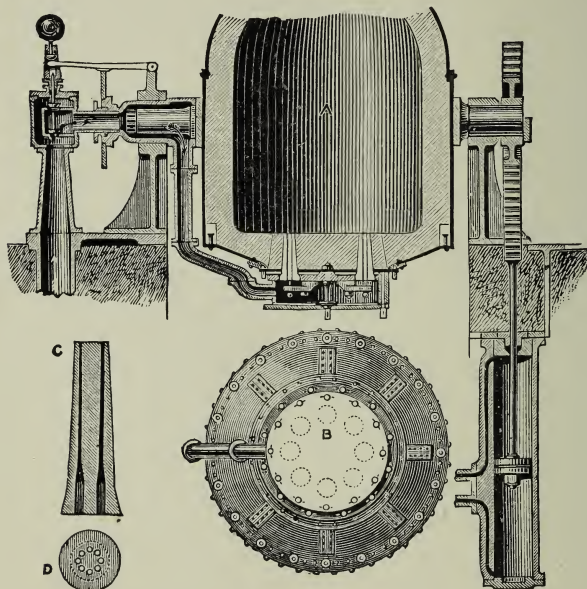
Bessemer's Steel Converter.—A, Transverse section through trunnions; B, bottom plan; C, section of tuyère brick; D, plan of ditto, showing holes.
